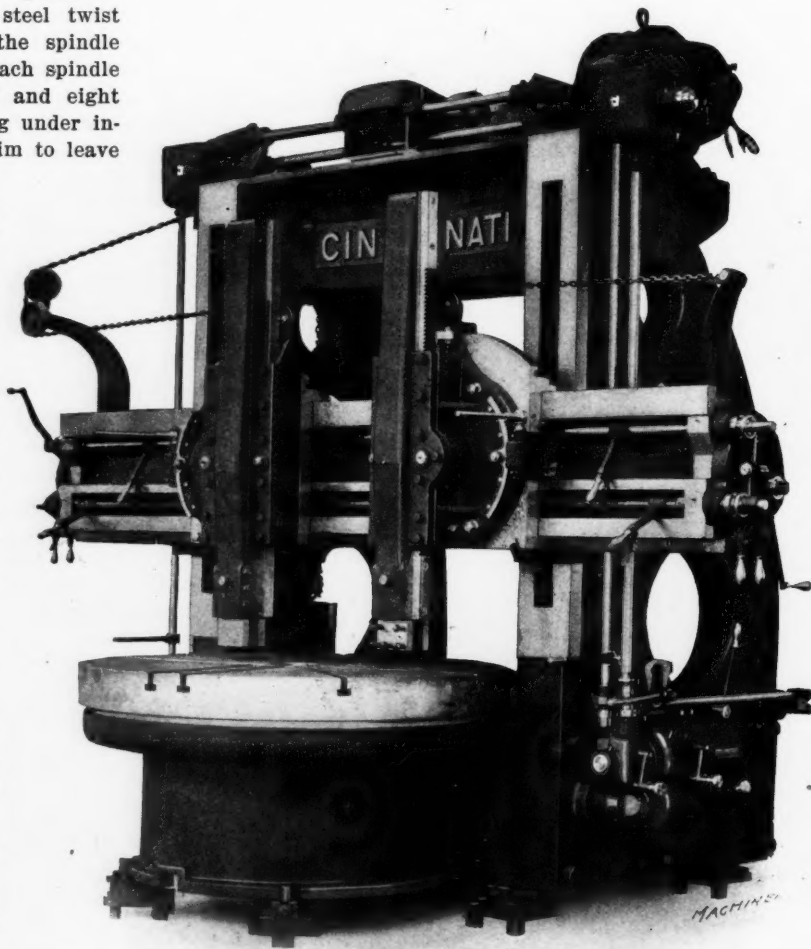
Front View of Improved Cincinnati Boring Mill made in Six and Seven Foot Sizes
